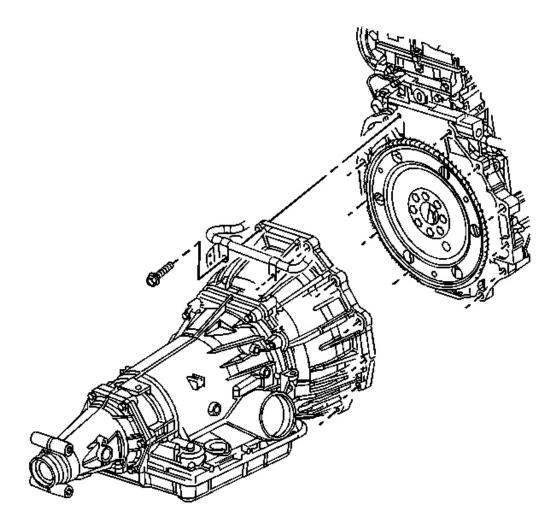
View Of Bell Housing Bolts Courtesy of GENERAL MOTORS CORP.
